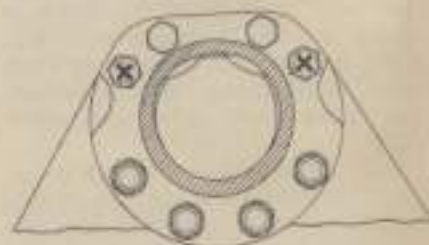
On D-17 when installing new ball pinion shaft housing (31—Figs. 122 and 133), holes indicated by "X" in new housing must be reamed to 0.623-0.625 after pinion shaft housing is bolted to final drive housing. Use holes in final drive housing as guide for reamer.
